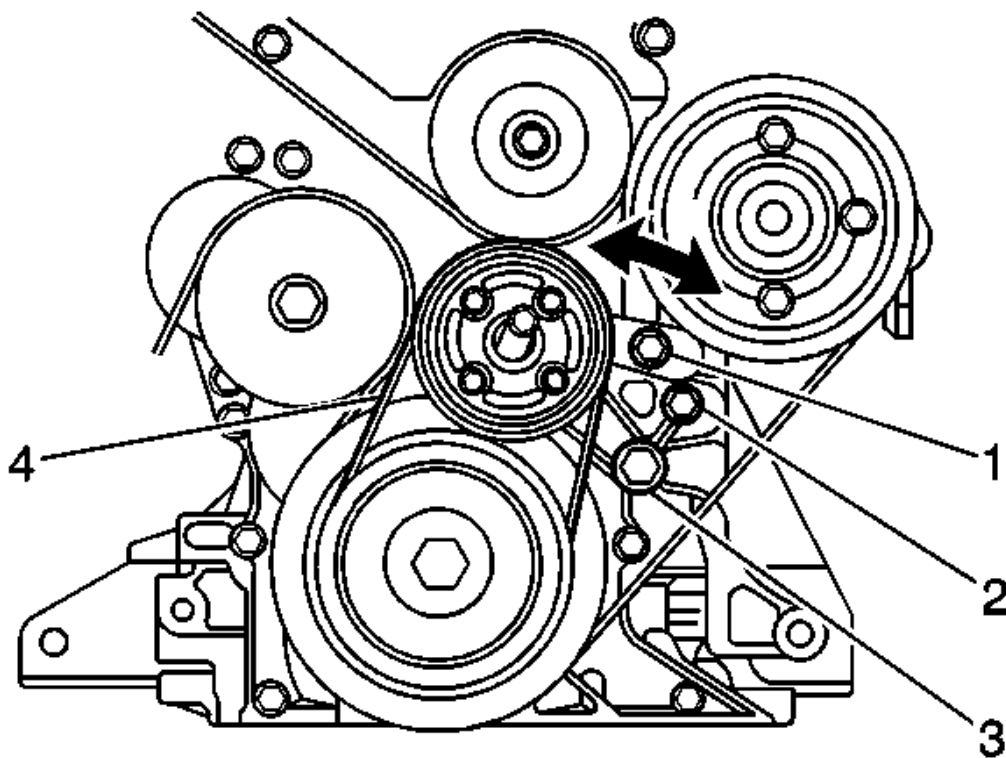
Drive Belt Routing & View Of Tension, Adjusting & Pivot Bolts
